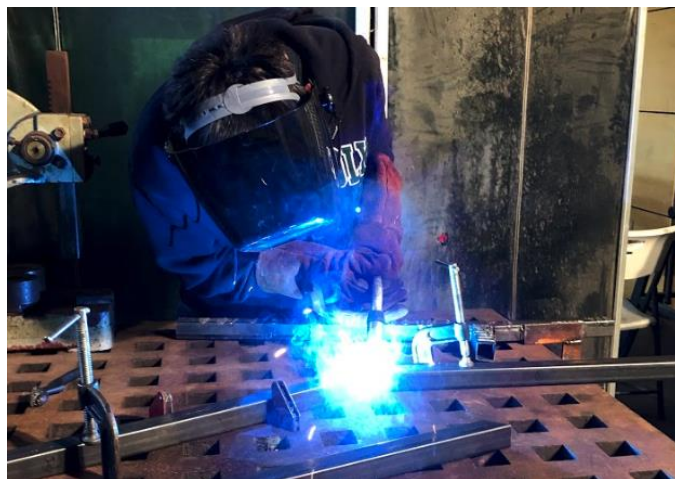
MIG welding was used to weld all steel components on the frame.
